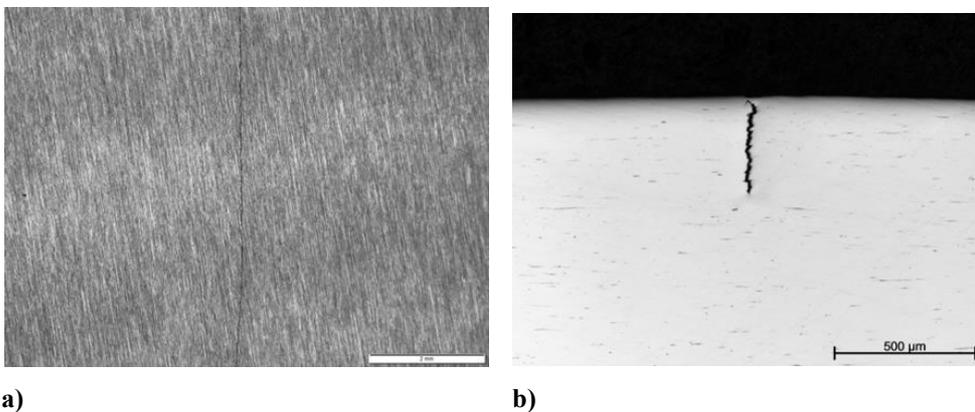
Displays of fabricated cracks in test specimen a) plan view b) cross section
